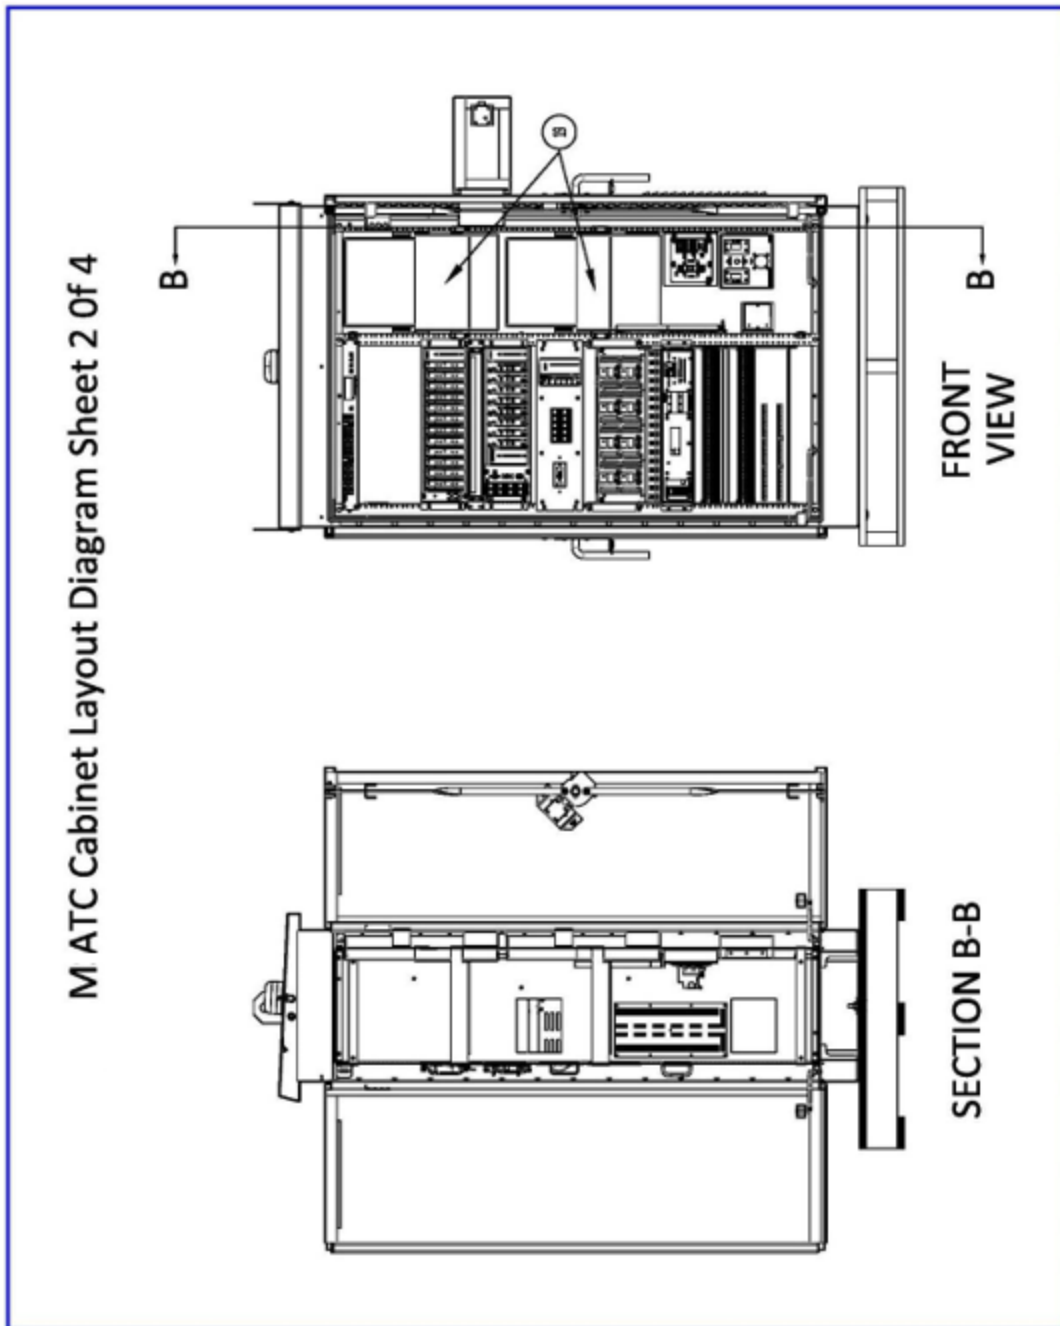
M ATC Cabinet Layout Diagram Sheet 2 of 4
